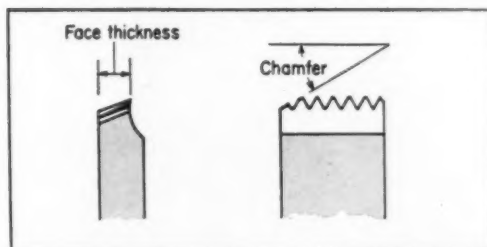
Correct chamfer improves surface finish and chaser life. Face thickness on milled-form chasers should not be changed in grinding.
